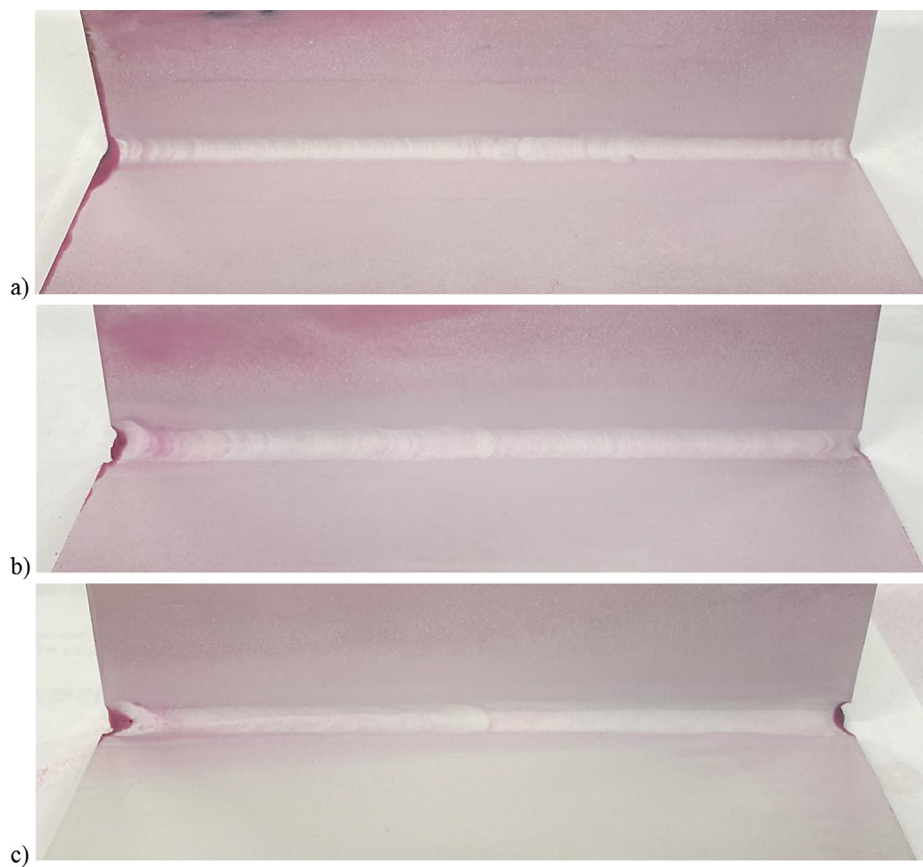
View of the joints of samples after penetrant testing a) S1, b) S2, c) S3
